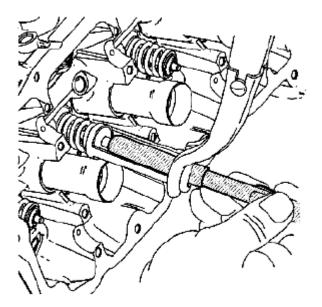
Compressing Valve Spring Using J 8062 And EN 46119 Courtesy of SUZUKI OF AMERICA CORP.
